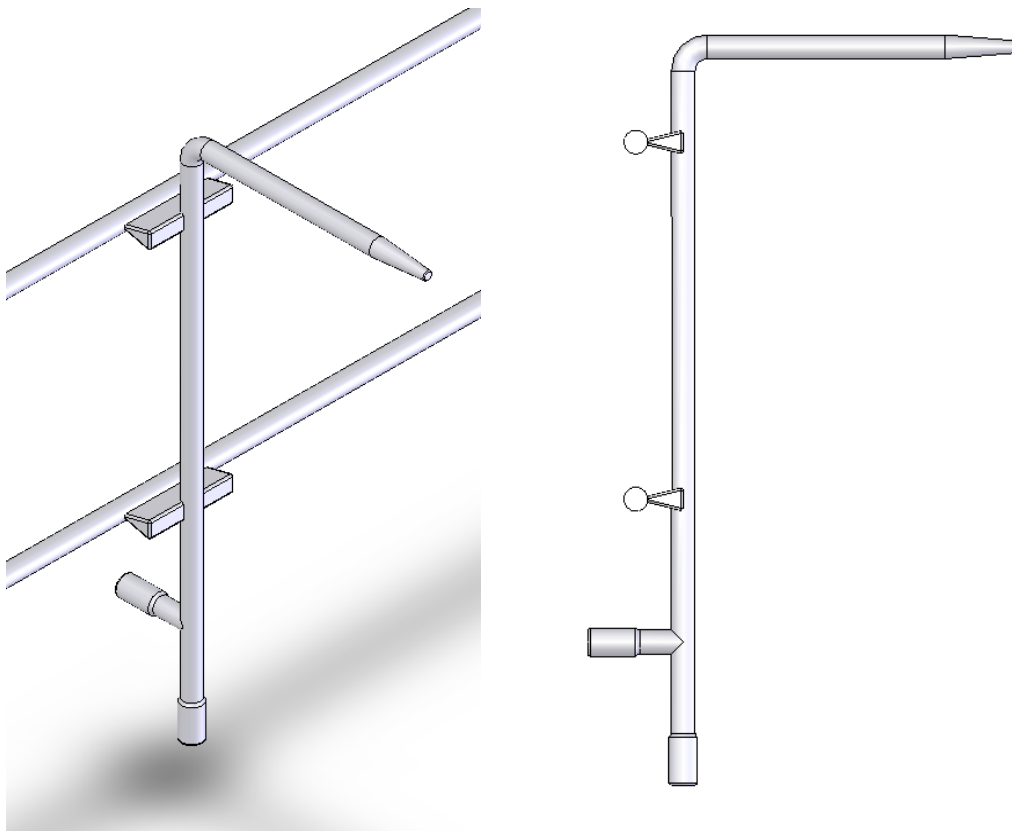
Proposed Pitot-Probe Mounting Arrangement
